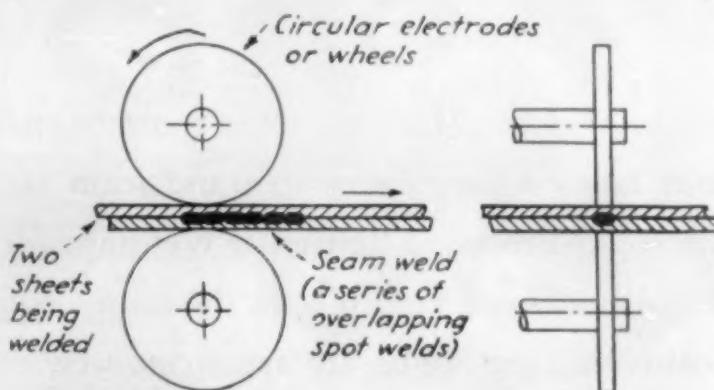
Diagram of Arrangement of Electrodes and Work in Seam Welding Operation
